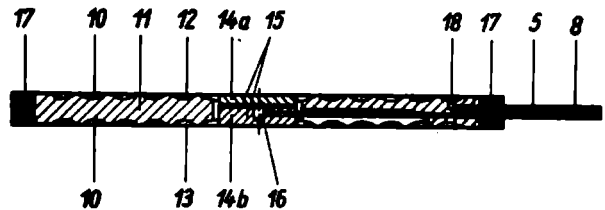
Section of a double-membrane valve-gauge (DM-VG)
